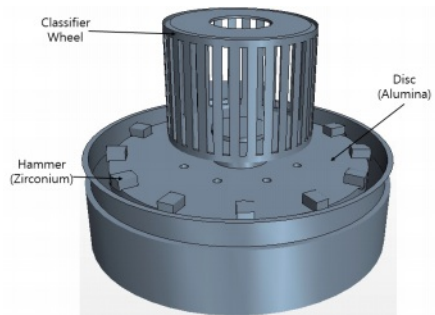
Grinding disc in Classifier Separator Mill (CSM)
